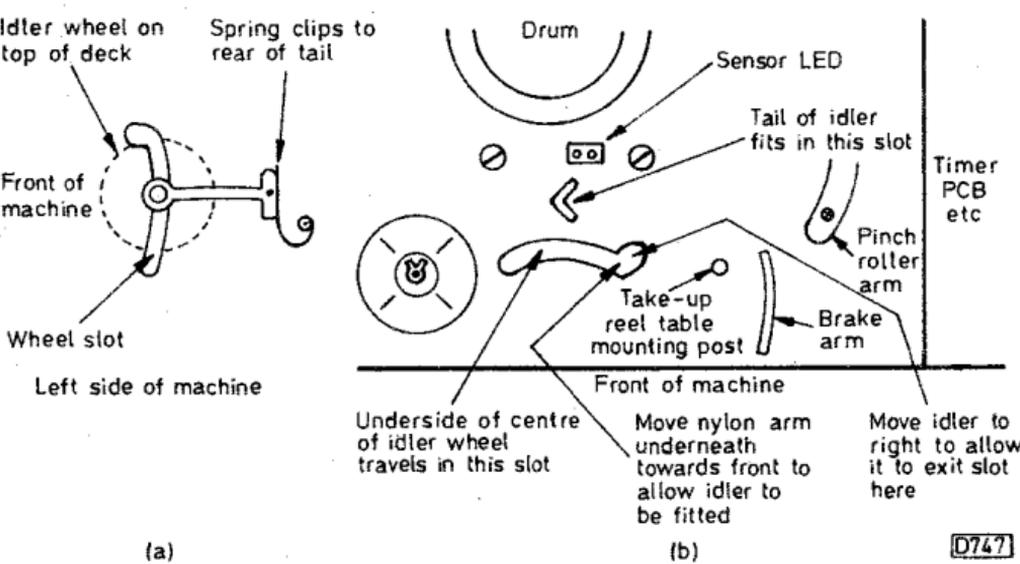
Replacing the idler. (a) Underside of the mechanism (simplified) showing the nylon arm and spring positions when fitting the idler. Machine is on its left-hand side. (b) A simplified view of the upper side of the mechanism, with the take-up reel table and the idler removed.
